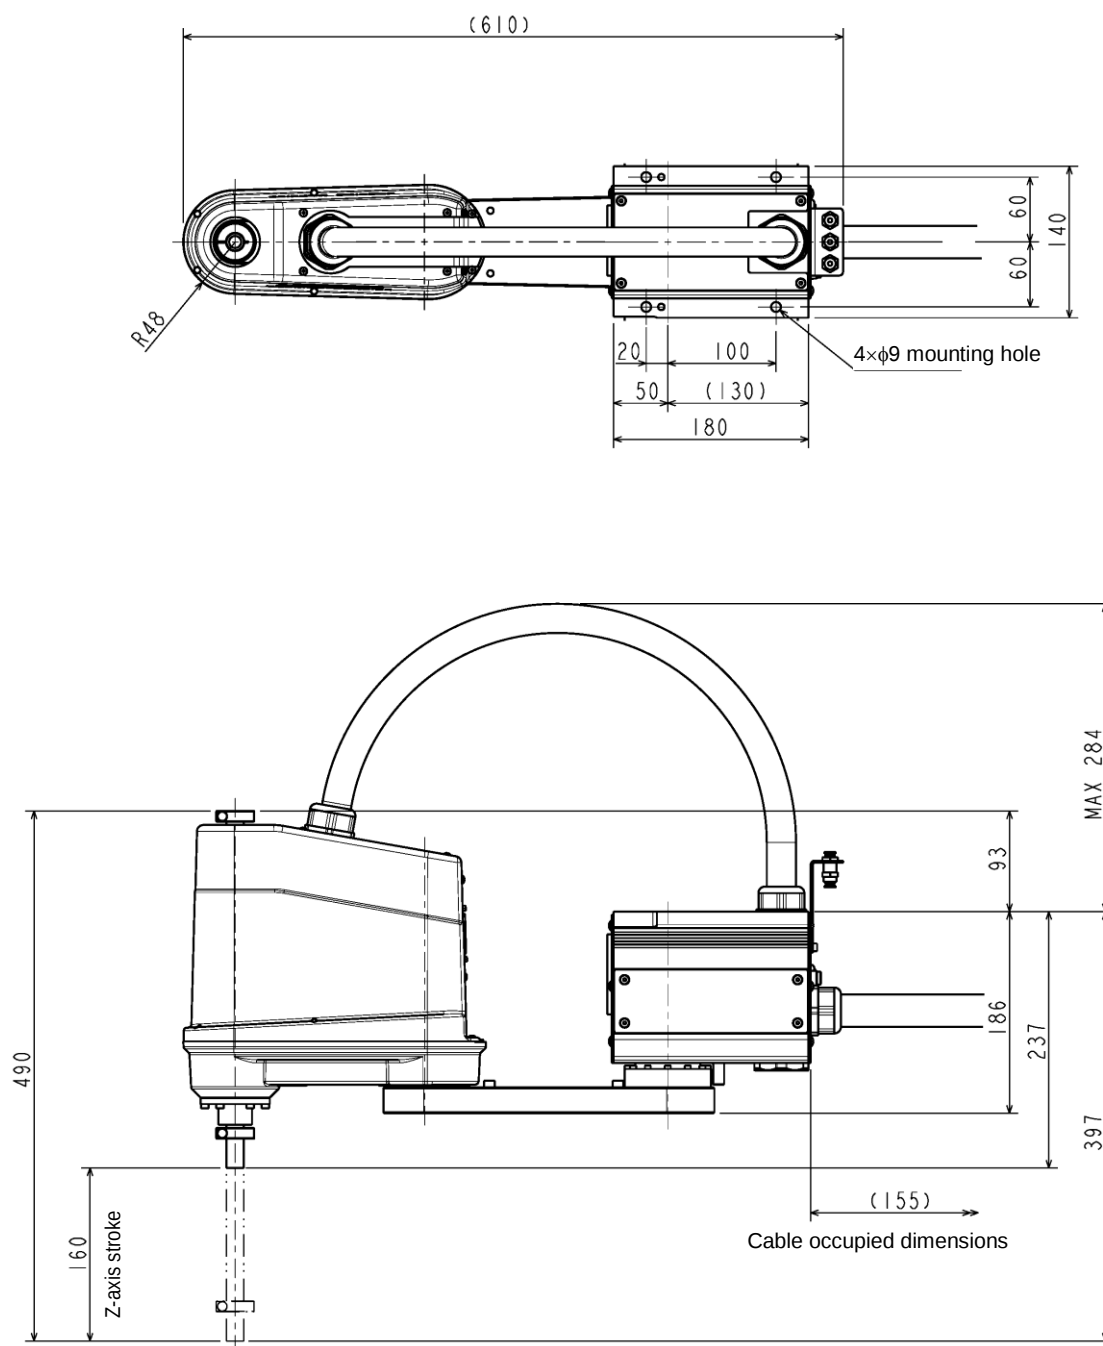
Outer dimensions of the robot (KHL-400-T)
